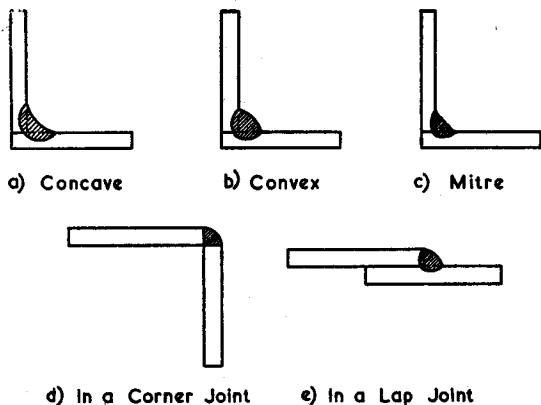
EXAMPLES OF FILLET WELDS
